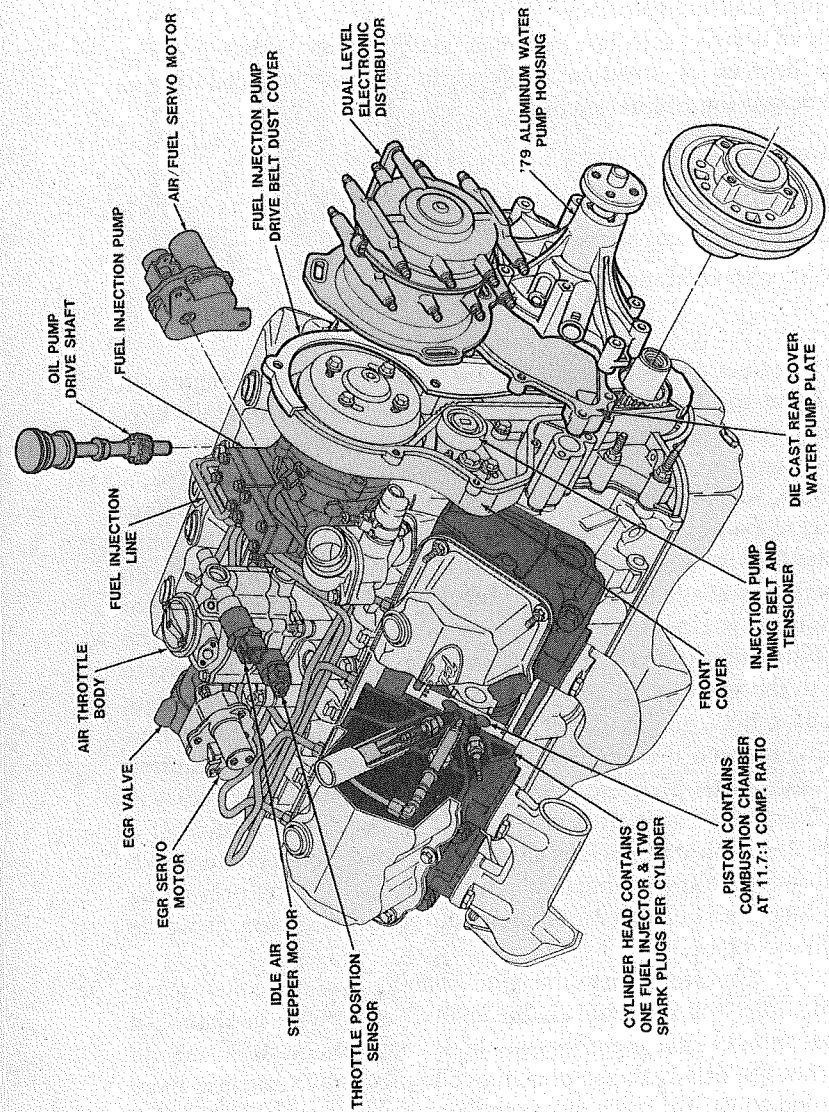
Ford's prototype open-chamber, stratified-charge engine. The fuel is directly injected into the cylinder but earlier in the compression stroke than with a diesel engine allowing use of a lower injection pressure. Two spark plugs ensure reliable ignition. Courtesy Ford Motor Company.
